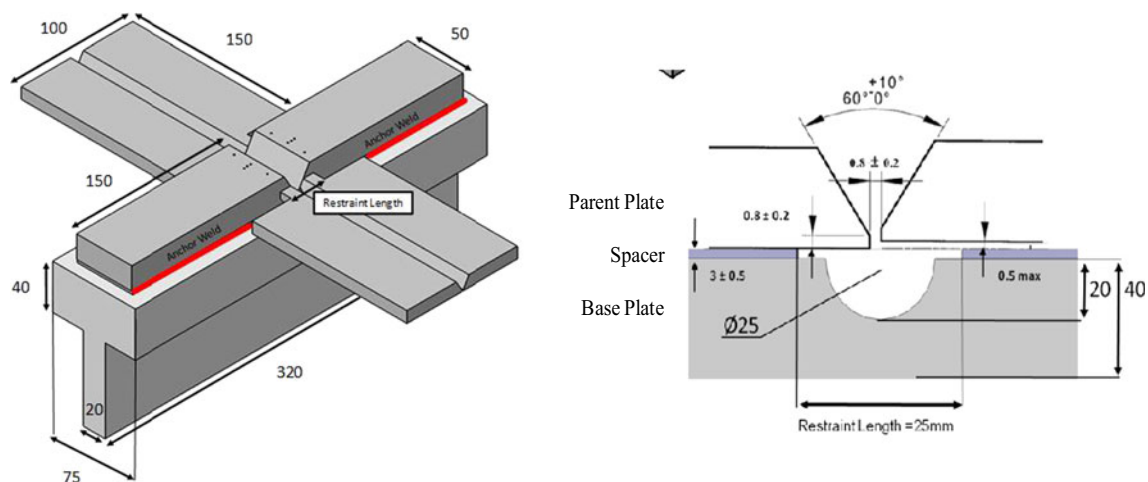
Dimensions of the MWIC weldability test and single V butt weld preparation used for weldability testing. All dimensions in millimeter
